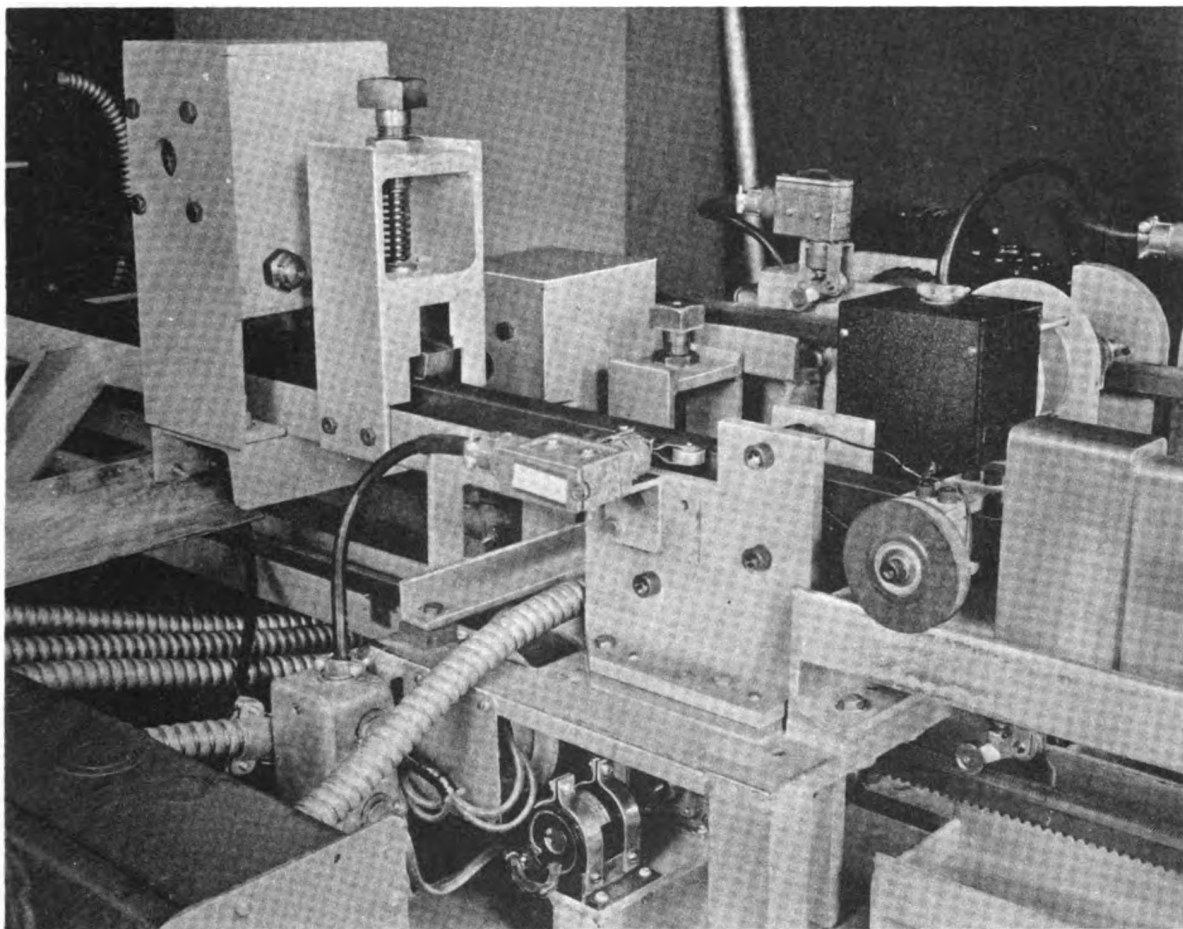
View of control- and safety-rod assembly, showing brake system for safety rods.
